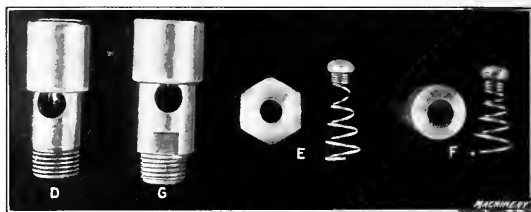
Styles D, E, F and G of Tucker Oil Hole Covers shown Open
